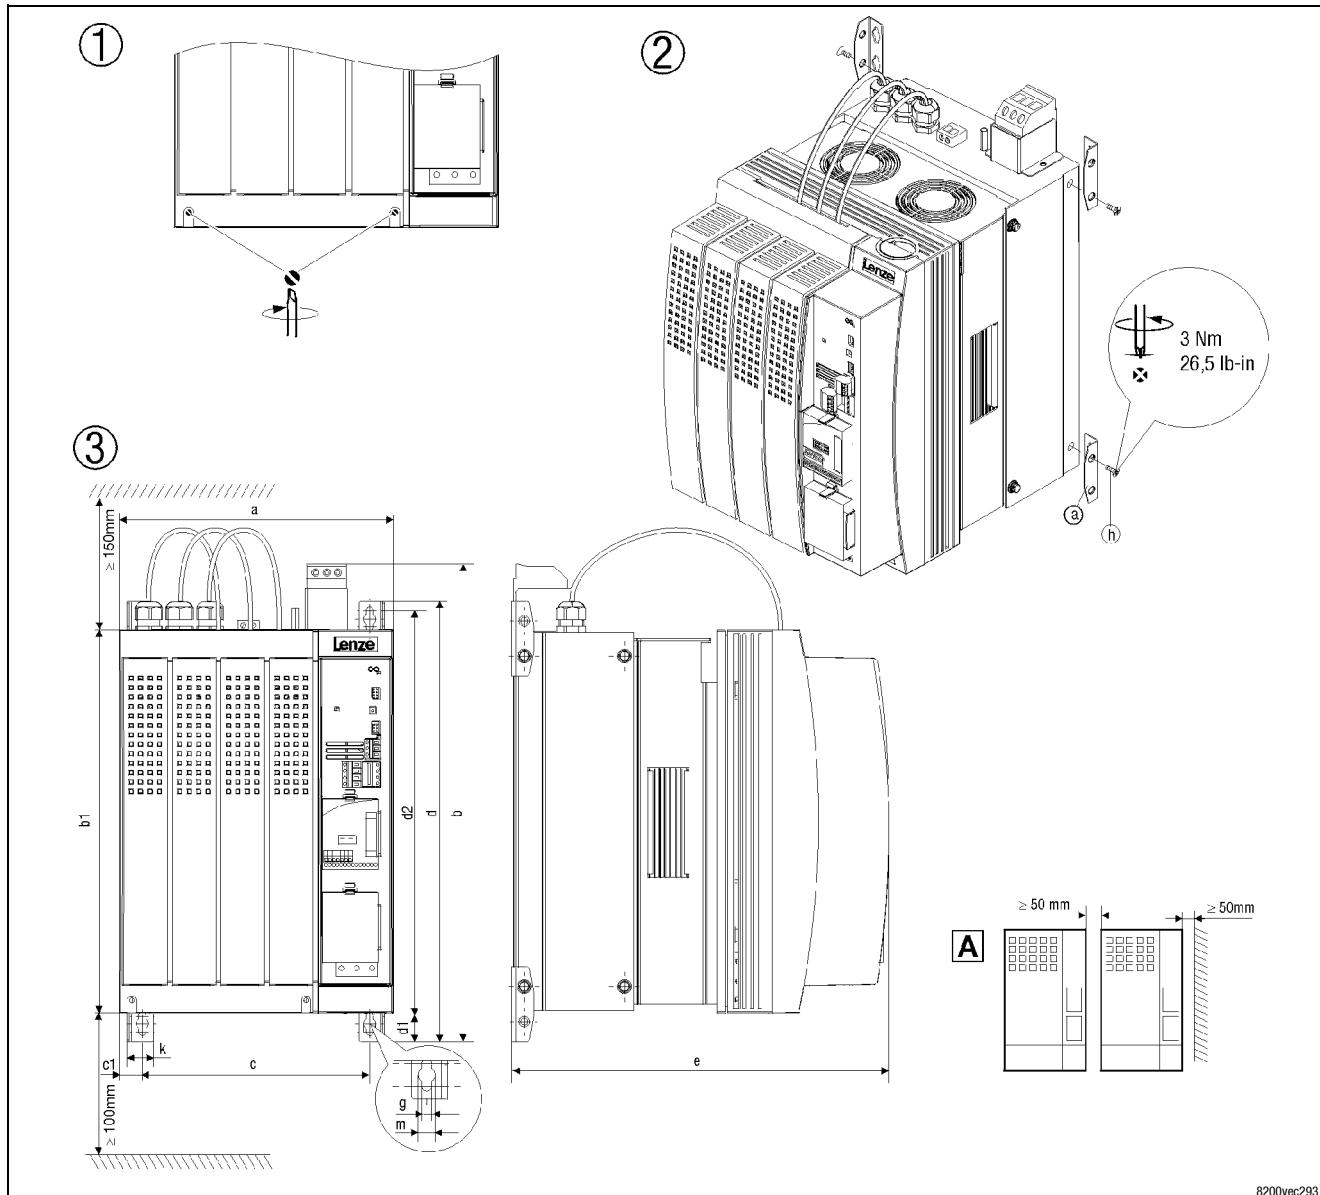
Standard mounting with footprint mains filter 15 ...30 kW
